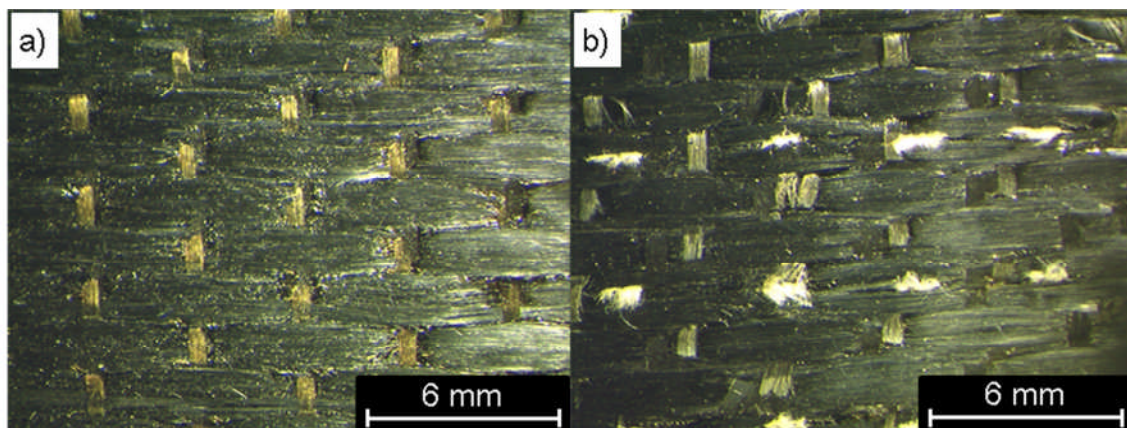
Fracture surface of unbindered specimens: a) untufted control and b) aramid tufted for tufting depth of 5.2 mm.
